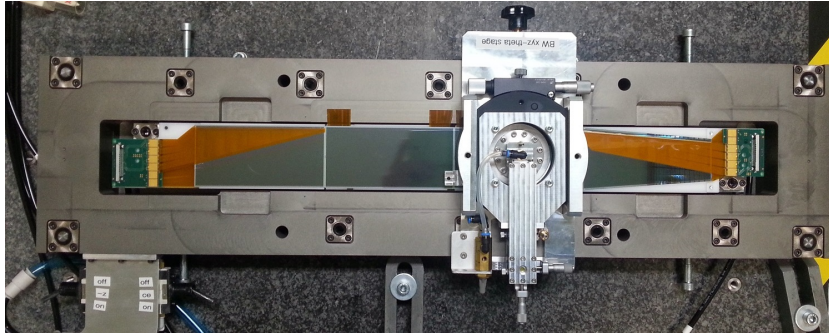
Using the XYZ theta alignment stage to align the sensors
